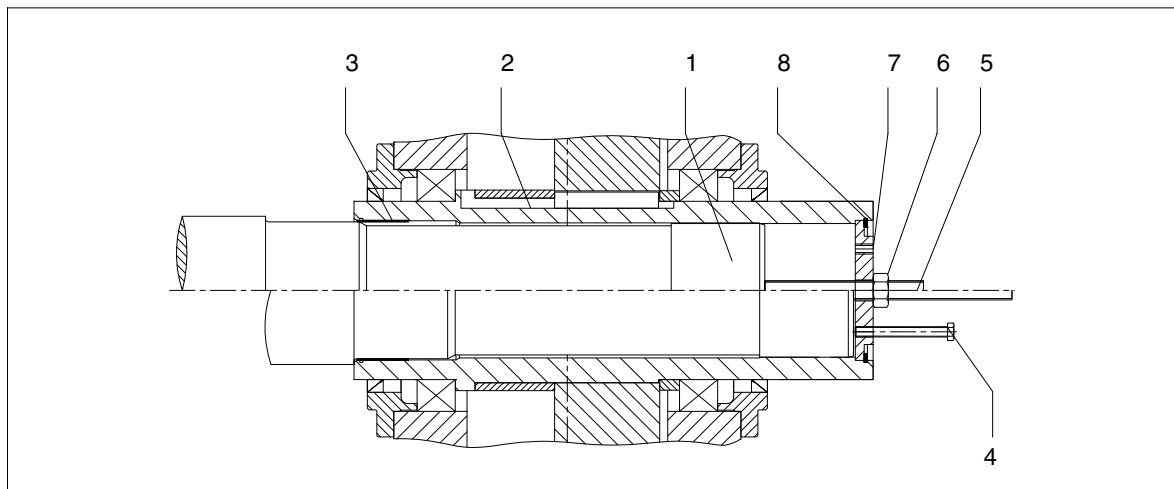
Hollow shaft in shrink-disk design, mounting with DU bush
